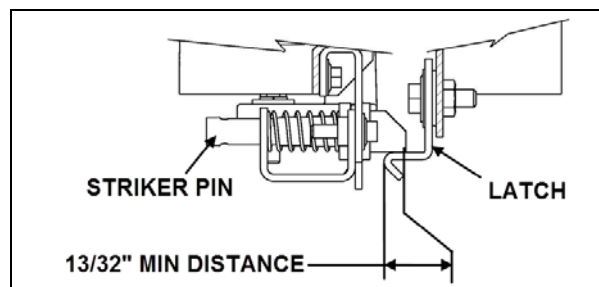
STRIKER PIN ENGAGEMENT 18695
